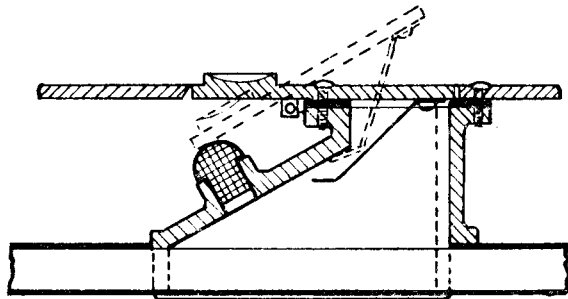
MIX AND GENEST VACUUM DESPATCHING VALVE.
